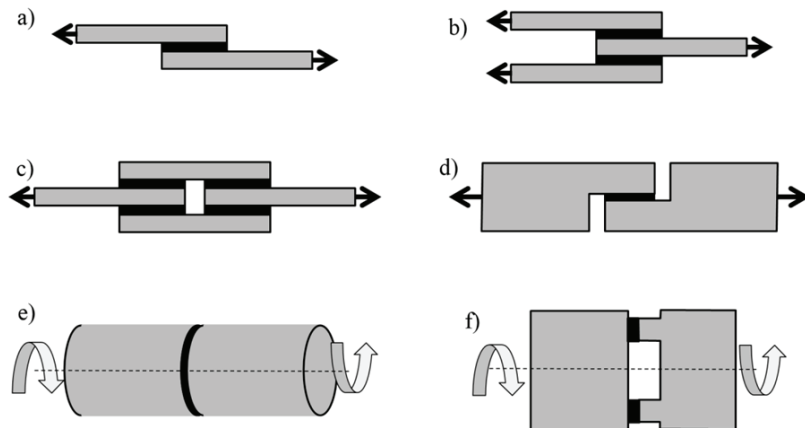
Common specimen geometries for testing of adhesive shear joints. a) The single lap joint, b) the double lap joint, c) the double lap strap joint, d) the thick adherend specimen, e) the butt-bonded hollow cylinder and f) the napkin ring specimen.
